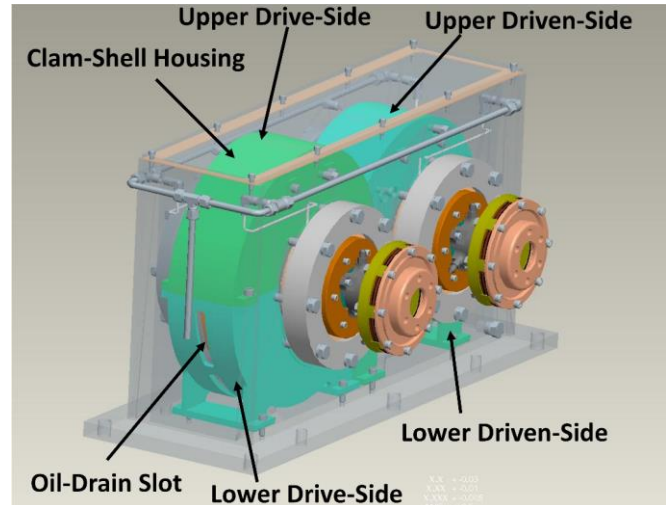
Test gearbox showing clam-shell enclosure for shrouding within the NASA Gearbox.
